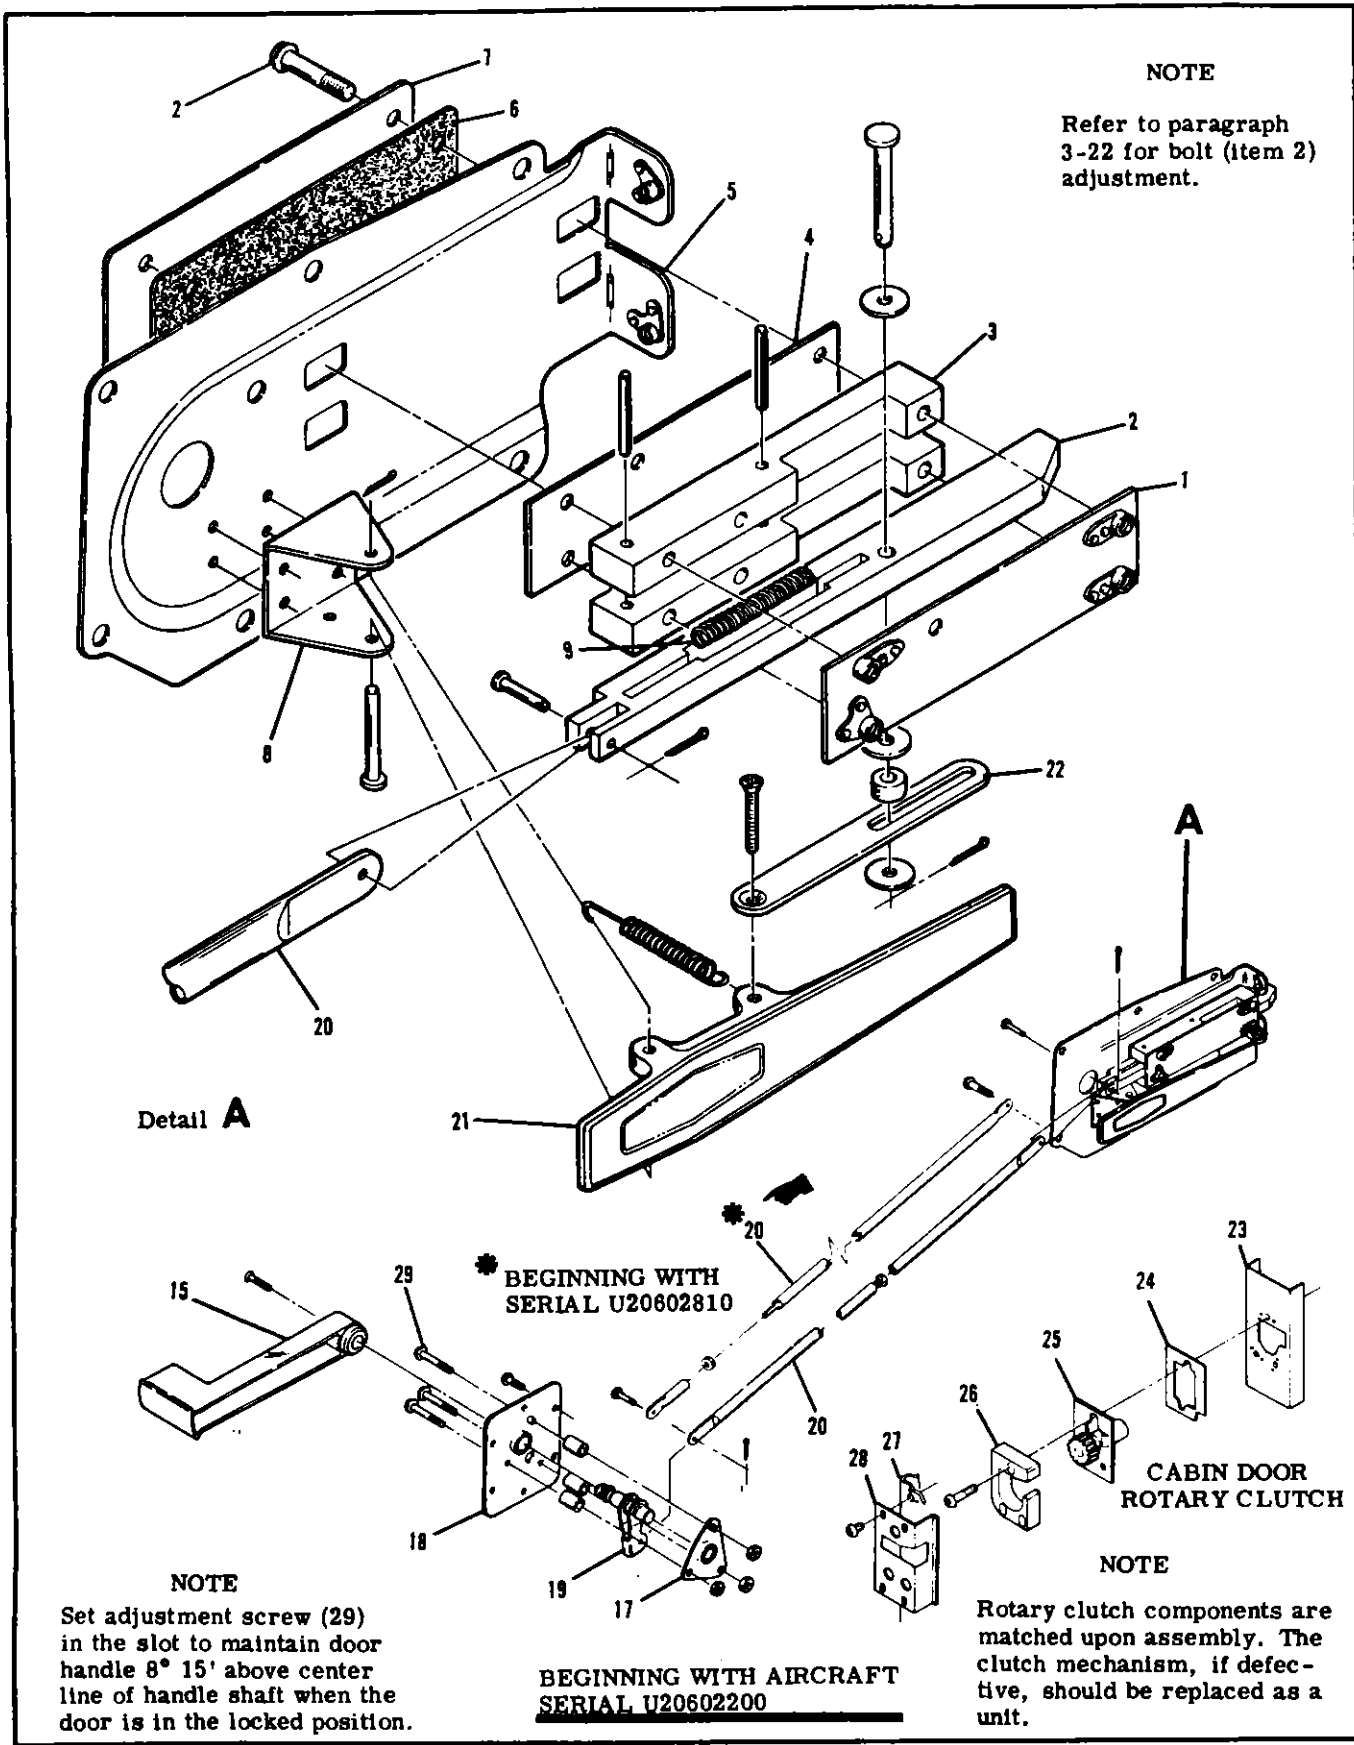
Door Latch and Rotary Clutch Components (Sheet 2 of 2)
